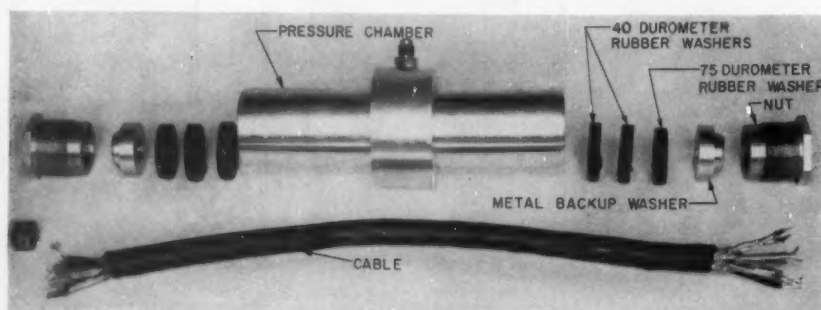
Exploded view of cable seal test unit. This arrangement withstood 5000 psi without leaking. The nuts act as support only and are not tightened.
